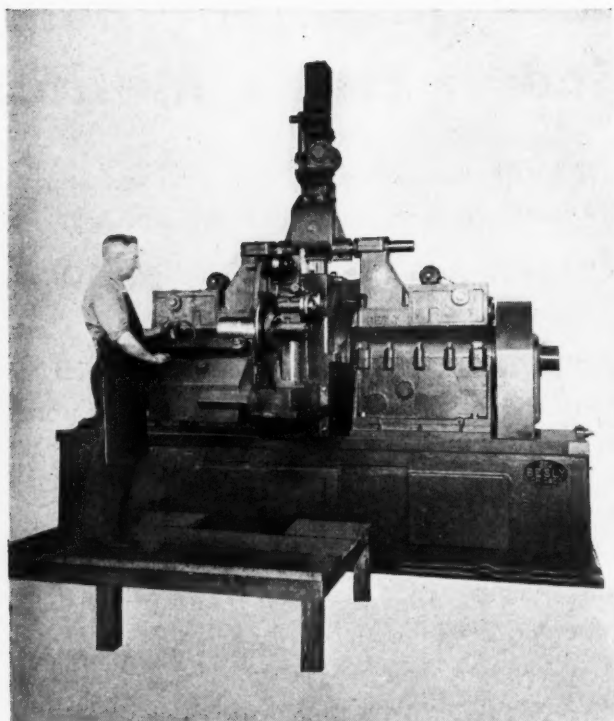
Besly Double Horizontal-spindle Parallel-surface Rough- and Semi-finish Grinding Machine
